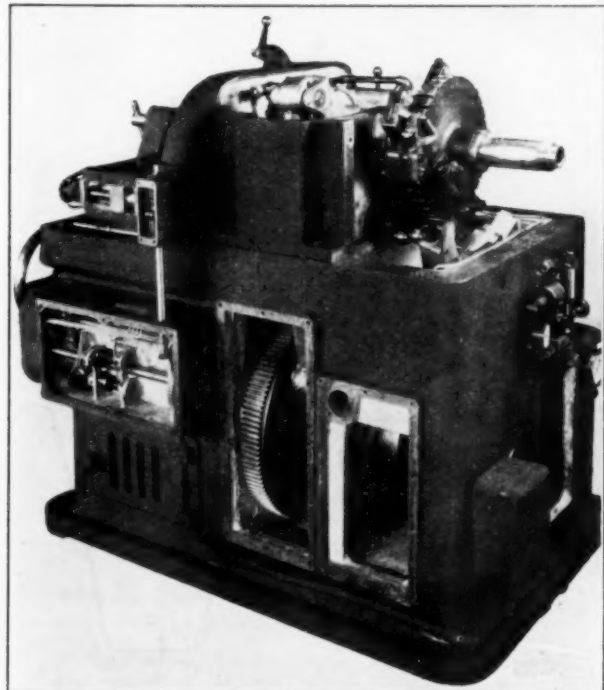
REAR OF MACHINE WITH GUARDS REMOVED
